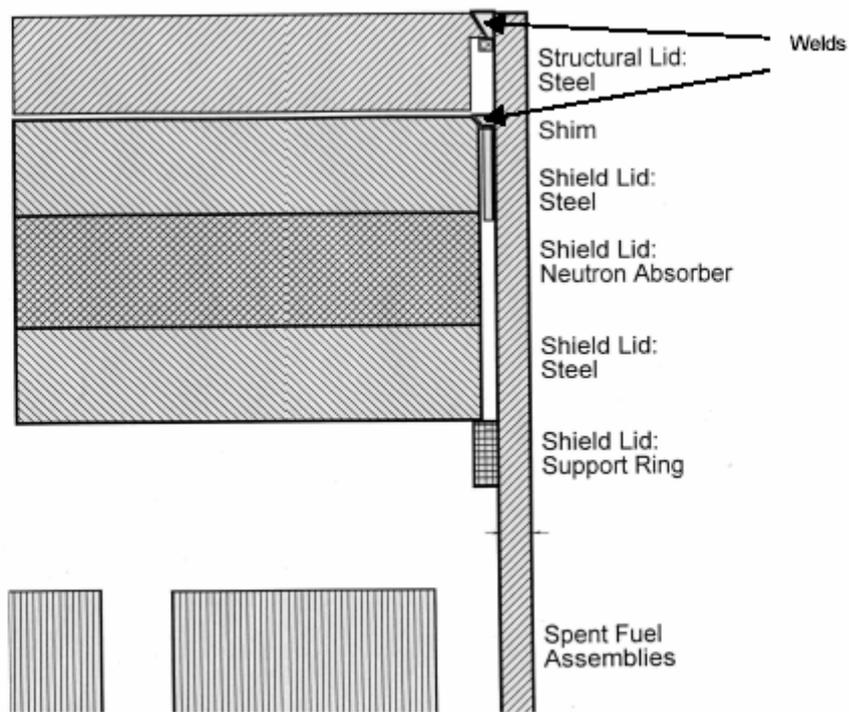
Illustration of Closure Welds for the VSC-24 Dry Storage Cask (DOE 2000)
